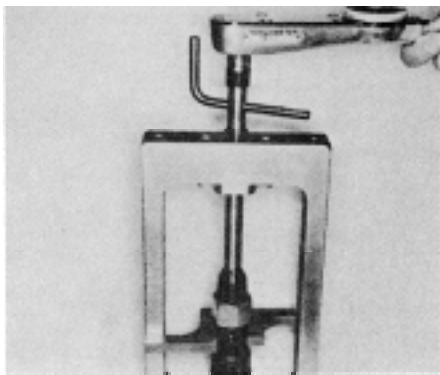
, F60196. Torquing loading fixture stud of 3375084
